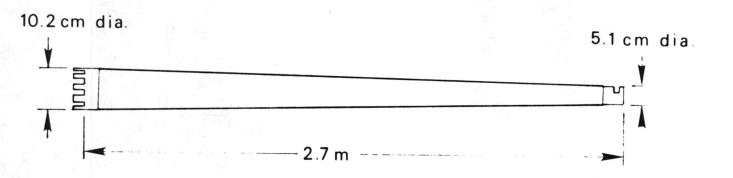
Typical graphite-epoxy nestable strut elements for tetrahedral truss beam.
